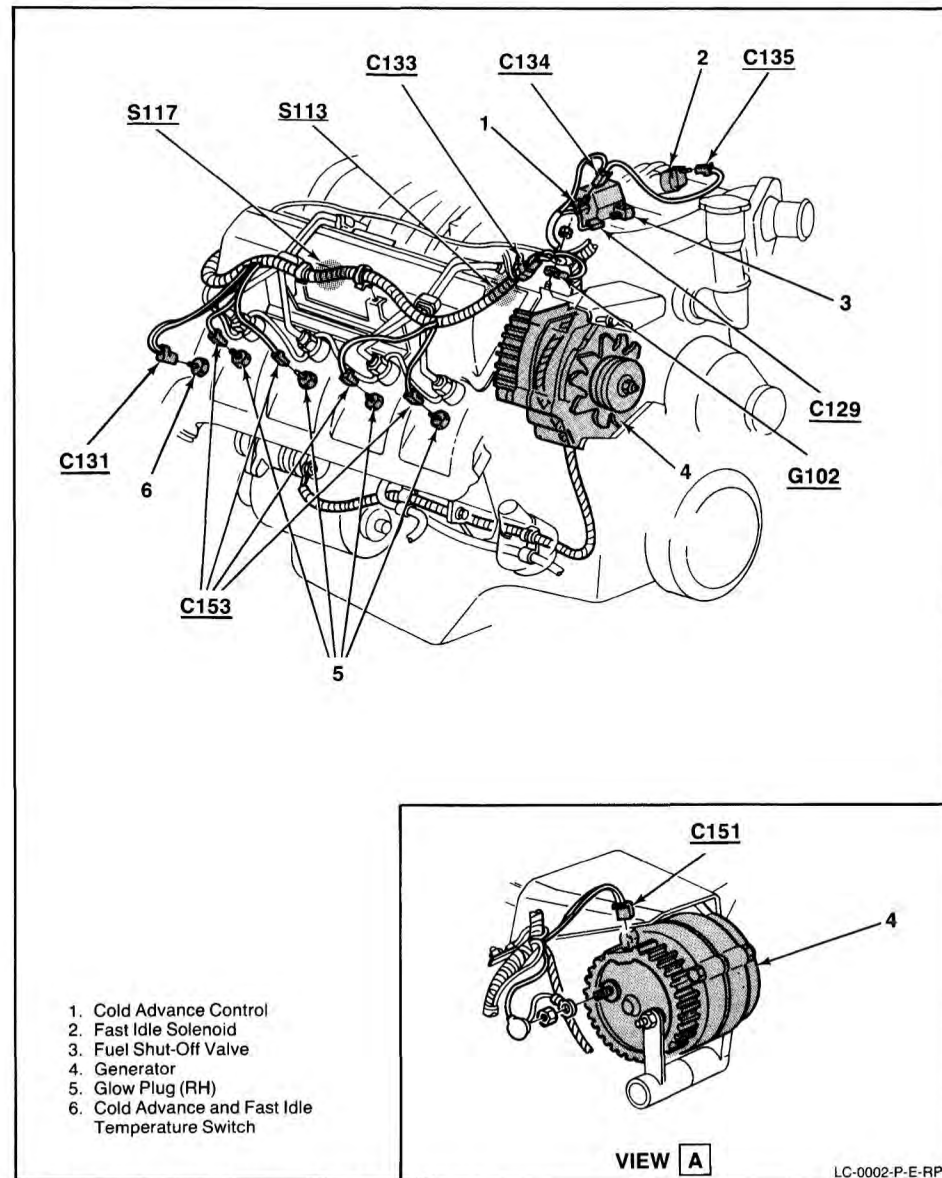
Engine Wiring Harness - Right Side (RPO LL4)
